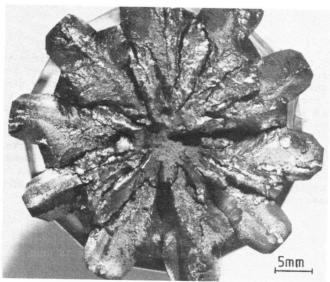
Service failure of case carburised splined shaft showing longitudinal shear cracks emerging on transverse shear fracture face.
